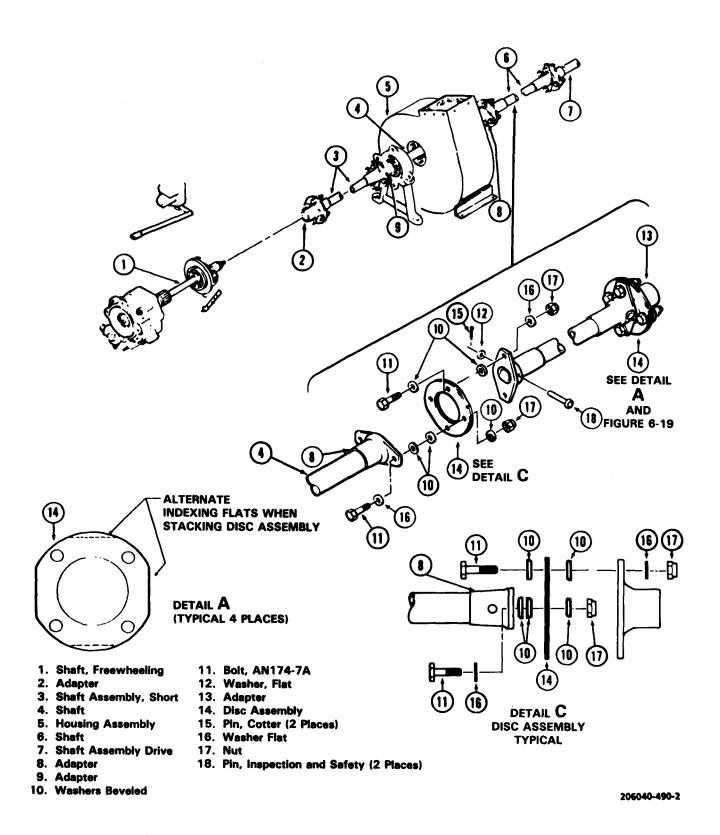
Driveshafts – Tail Rotor (Forward Short Shaft Typical) (Sheet 2)
